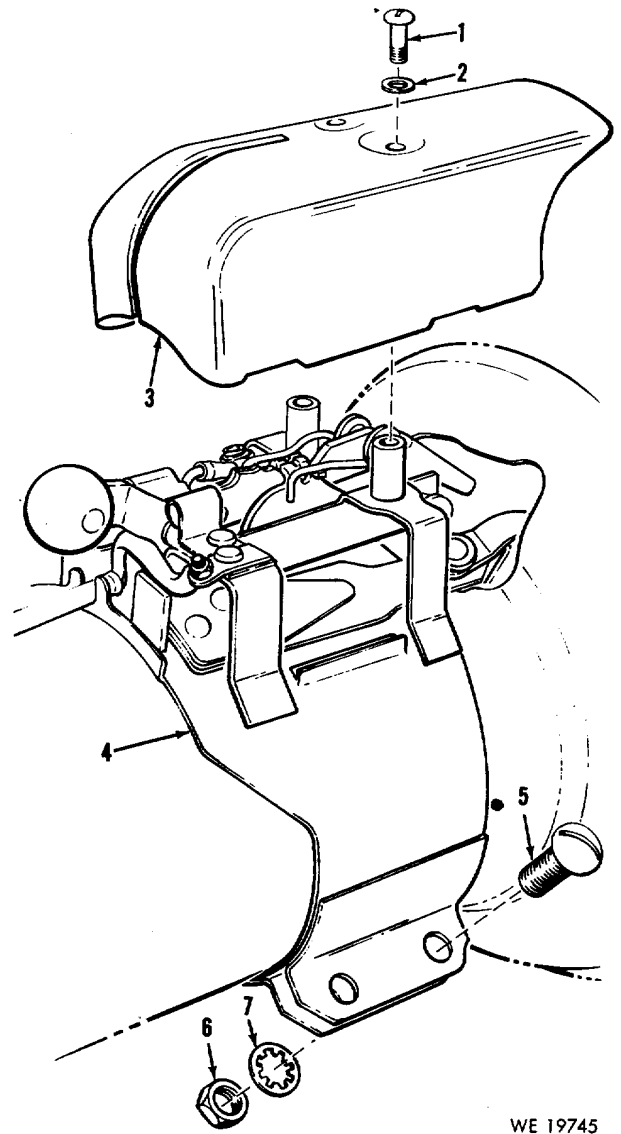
Contractor latch assembly 7184159 (M20A1 and M20A1B1)--partial exploded view.
